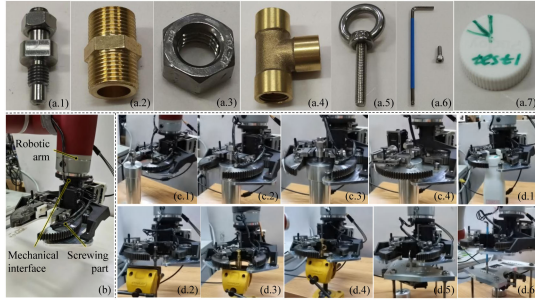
(a.1) The target bolts. (a.2,3) Hexagon bolts or nuts. (a.4,5) Irregularly shaped objects like pipe joints and special bolts. (a.6) Common bolts. (a.7) Cylinders like bottle caps. (b) The Screwing Part was mounted at the end of a 6-DOF robotic arm. (c.1) Approaching the target bolt. (c.2) Reaching the target pose. (c.3) Adjusting the direction and width of the screwing mouth. (c.4) Screwing and unscrewing. (d.1-6) Screwing objects that are shown in (a.2-7).
